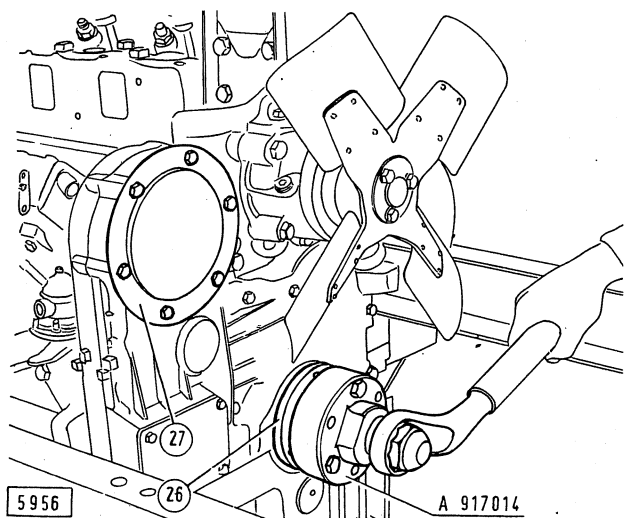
Removing the pulley hub (26) from crankshaft with the tool A 917014.
